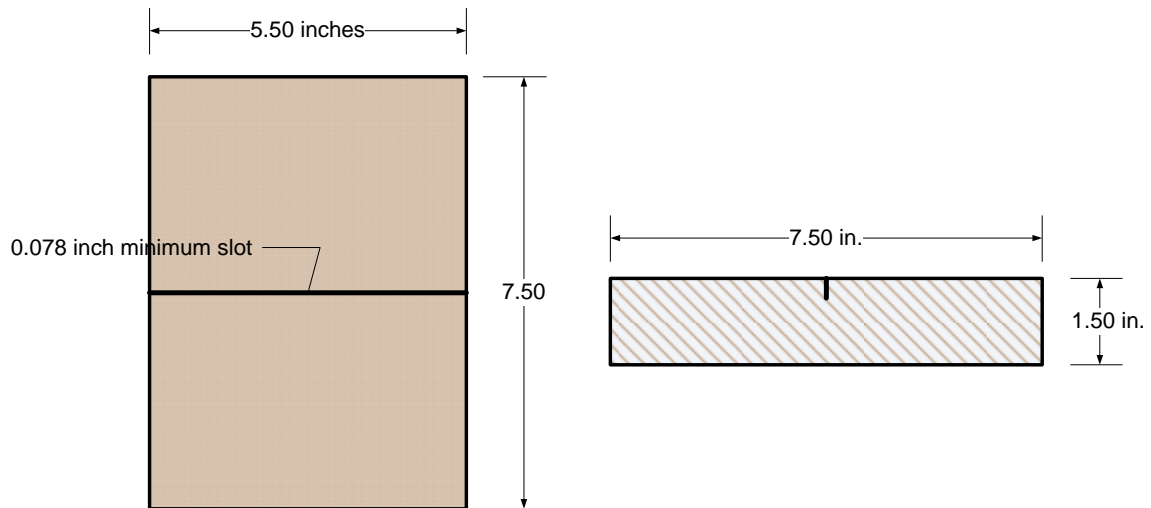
Stand Dimensions, view from top/plan view (left), view from side/elevation view (right)
